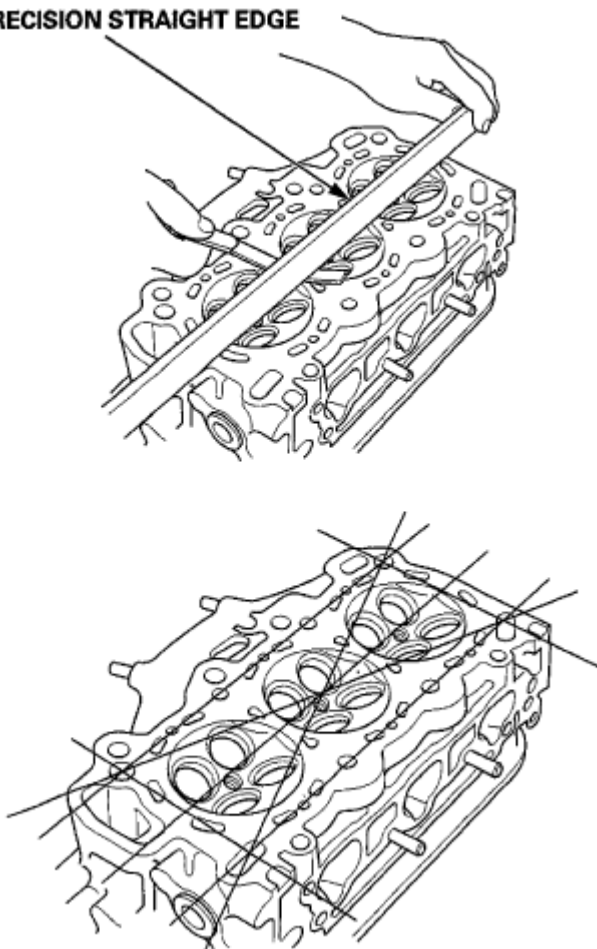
Checking Cylinder For Warpage Using Precision Straight Edge
